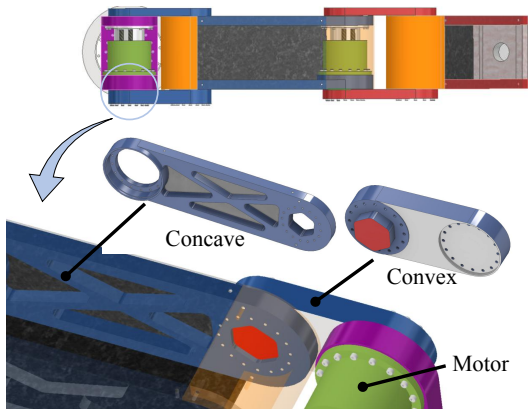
Fitting the interlocking parts of the 3-DOF manipulator.
